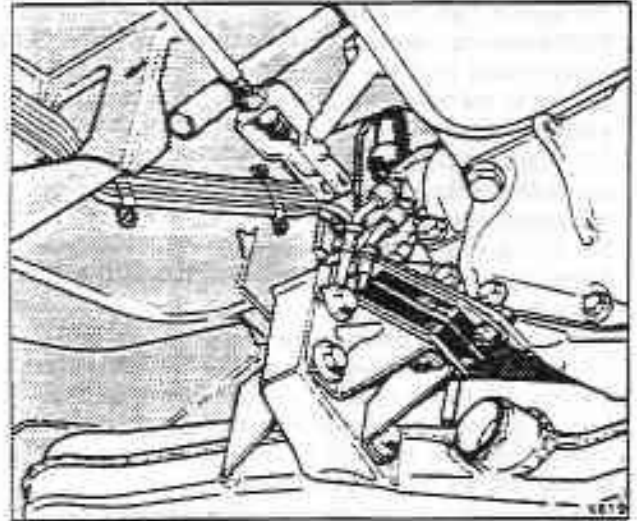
Hydraulic accumulator to body hoses disconnection points (Turbocharged cars, early arrangement shown)
